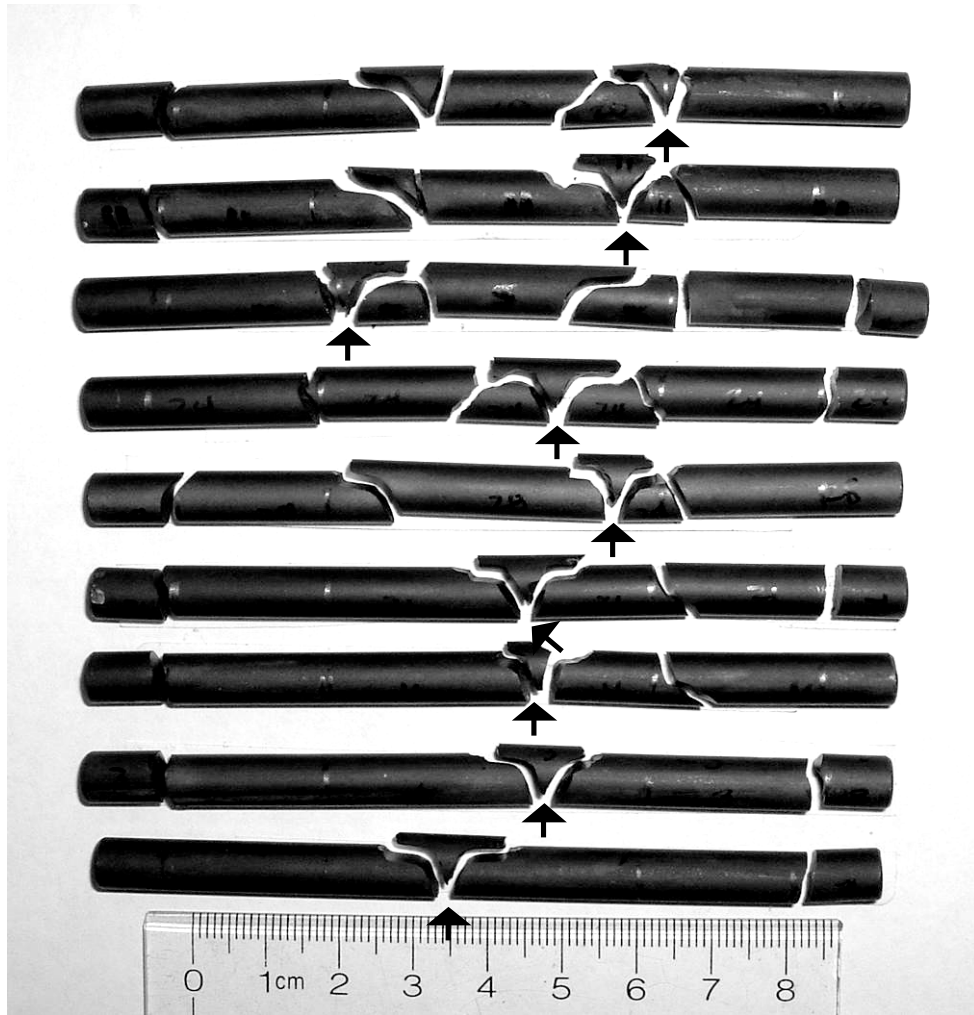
Fracture patterns in rods broken in four-point flexure. The arrows mark the primary fracture origins.
